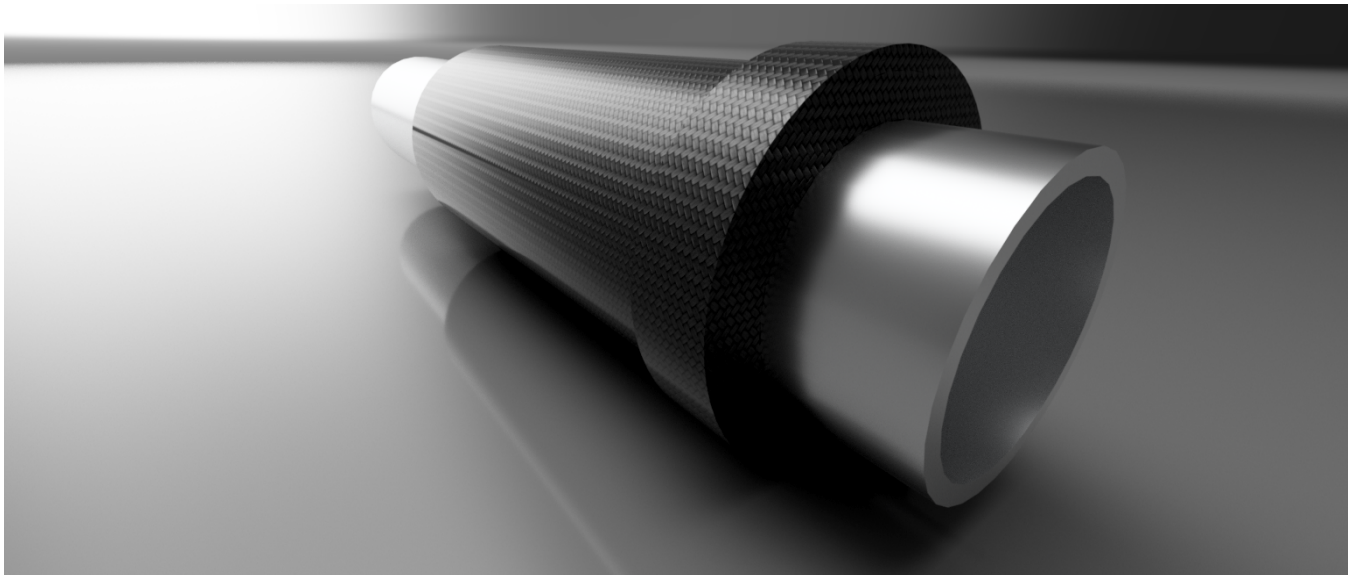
A 3D CAD rendition of the CFRP tube around the mold with its flange
